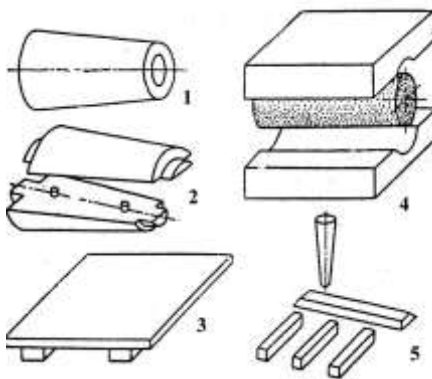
Casting and set of patterns and molding accessories: 1 – casting; 2 – pattern; 3 – molding board; 4 – core box with core; 5 – gating system pattern
